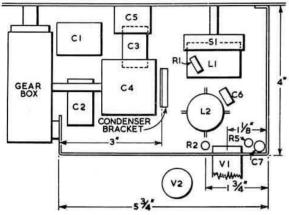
Plan view of the components inside the variable oscillator screened compartment. The former of L2 is fitted with a wooden plug bolted to the chassis. LI is mounted (in. above the chassis by means of two 6 BA bolts and spacers.
